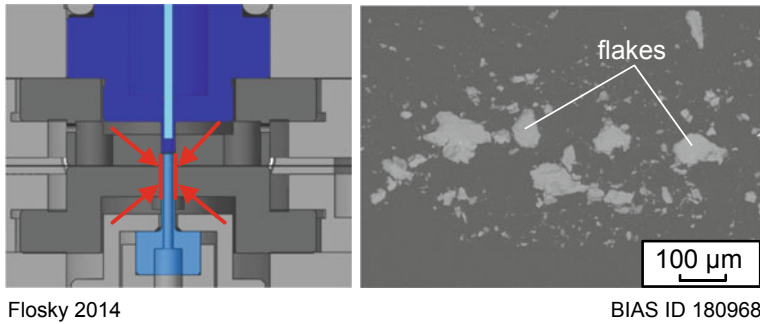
Area influenced by flakes (left) and flakes on the surface of the blanking and deep drawing die (right)
